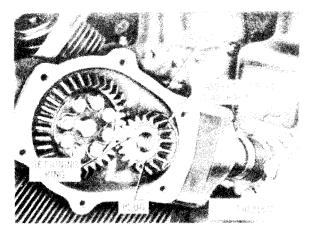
Removing or installing camshaft drive gearshaft oil transfer plug retaining ring.
